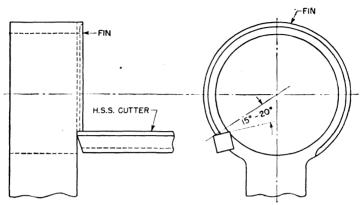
For removing heavy flash by facing, the cutting face of the cutter should be turned through an angle of 15 to 20 deg.
